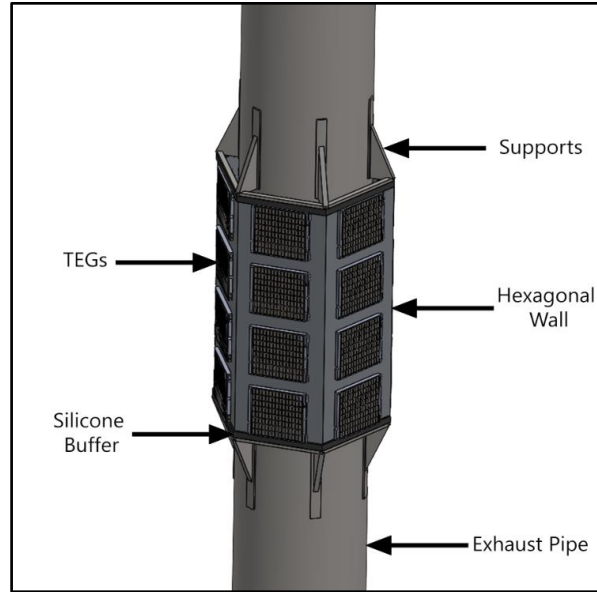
SOLIDWORKS Diagram of Parts Assembled in Final Design
